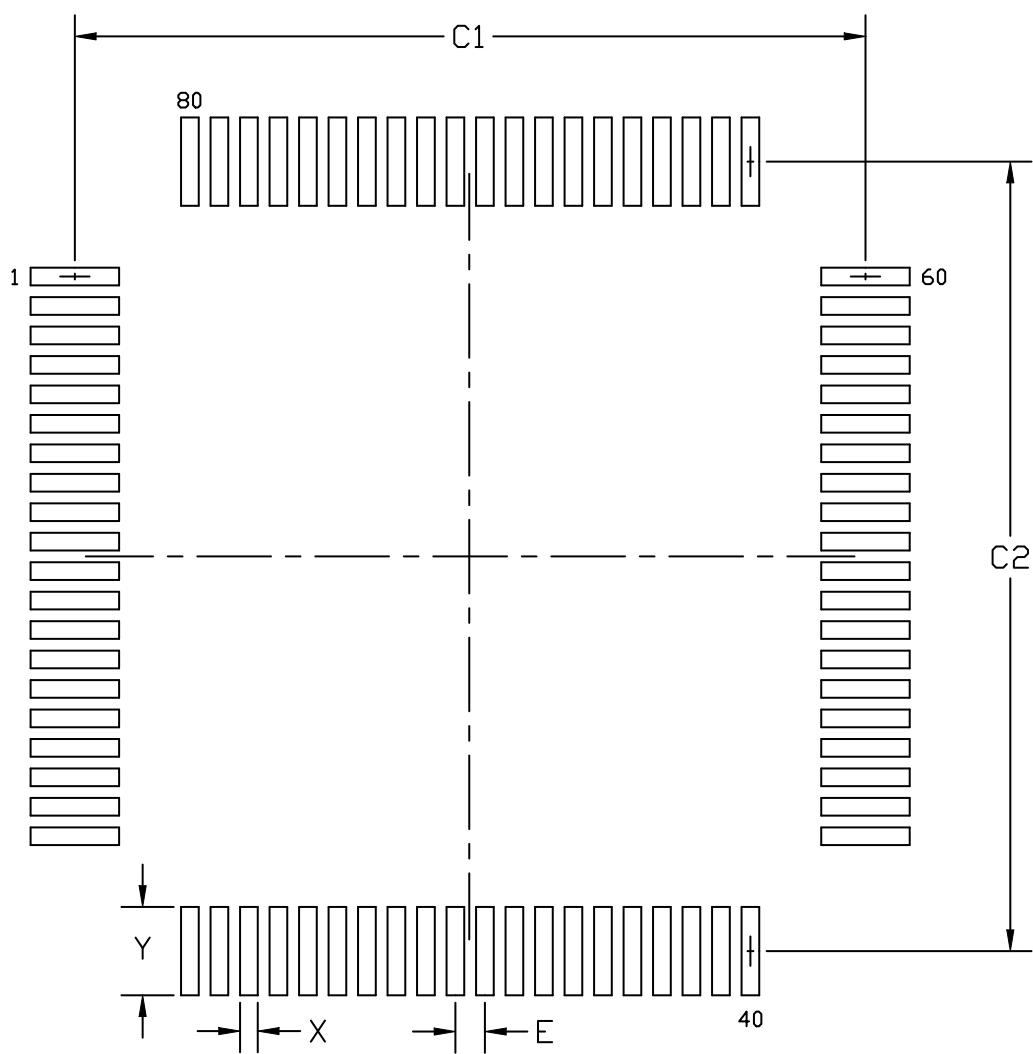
TQFP80 PCB Land Pattern Drawing
